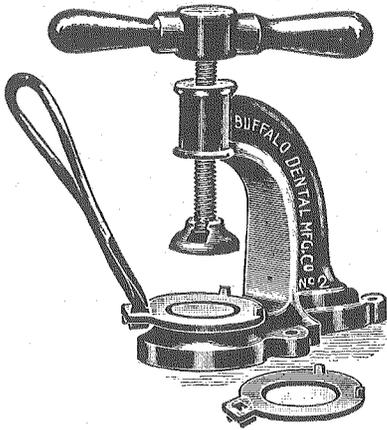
Double Handle Flask Closing Press. Screw 1/16 Pitch
